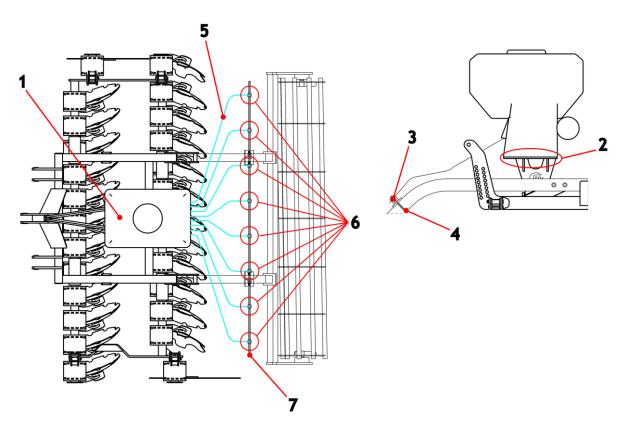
Representation of a mounted APV seed drill on a GAL-C disc harrow (1 - seed drill, 2 - seed drill mounting frame plate, 3 - hexagonal rod holder, 4 - bracket, 5 - supply hoses, 6 - places for attaching hoses to the rod, 7 - hexagonal rod)
